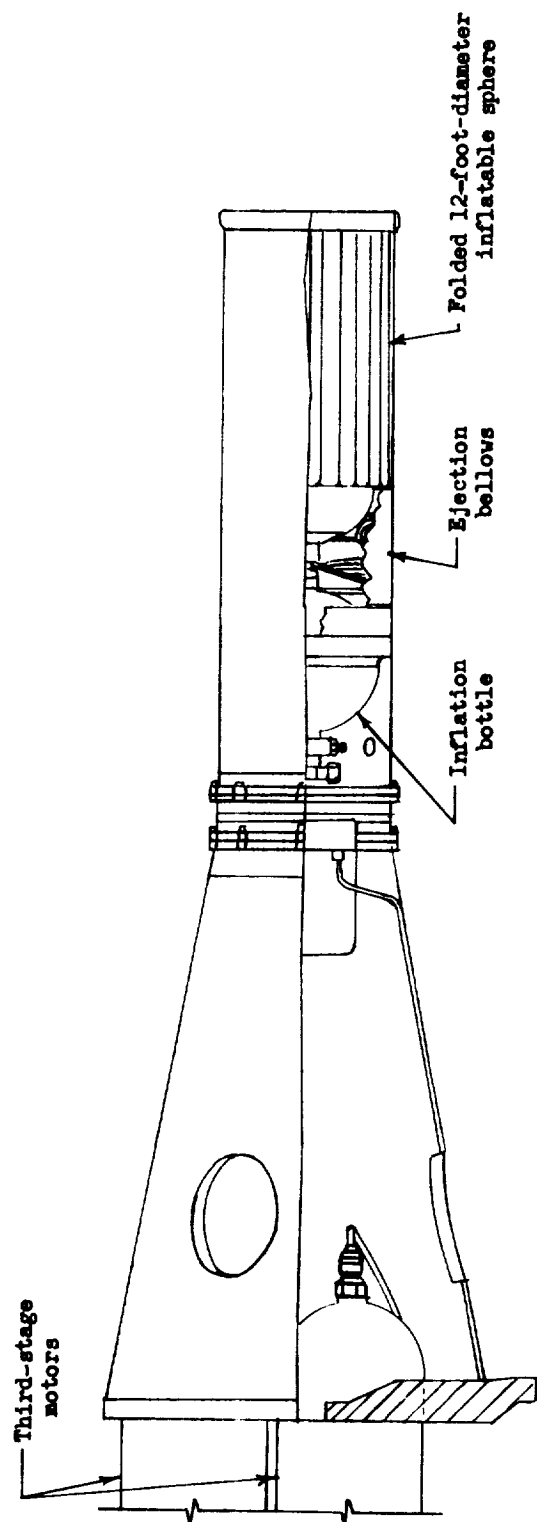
Third-stage motors and payload assembly of the Juno II payload package.
